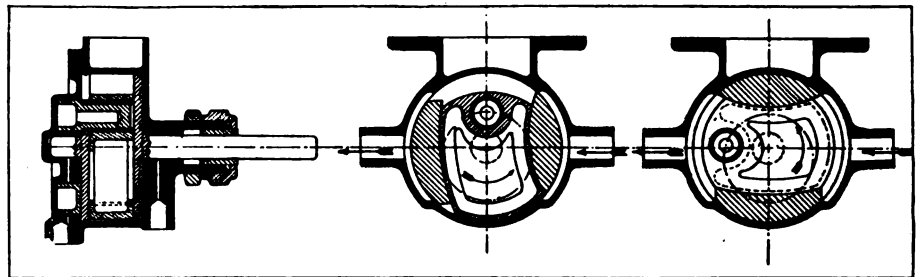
Sectional views of a Lamplough double-acting positive pump
